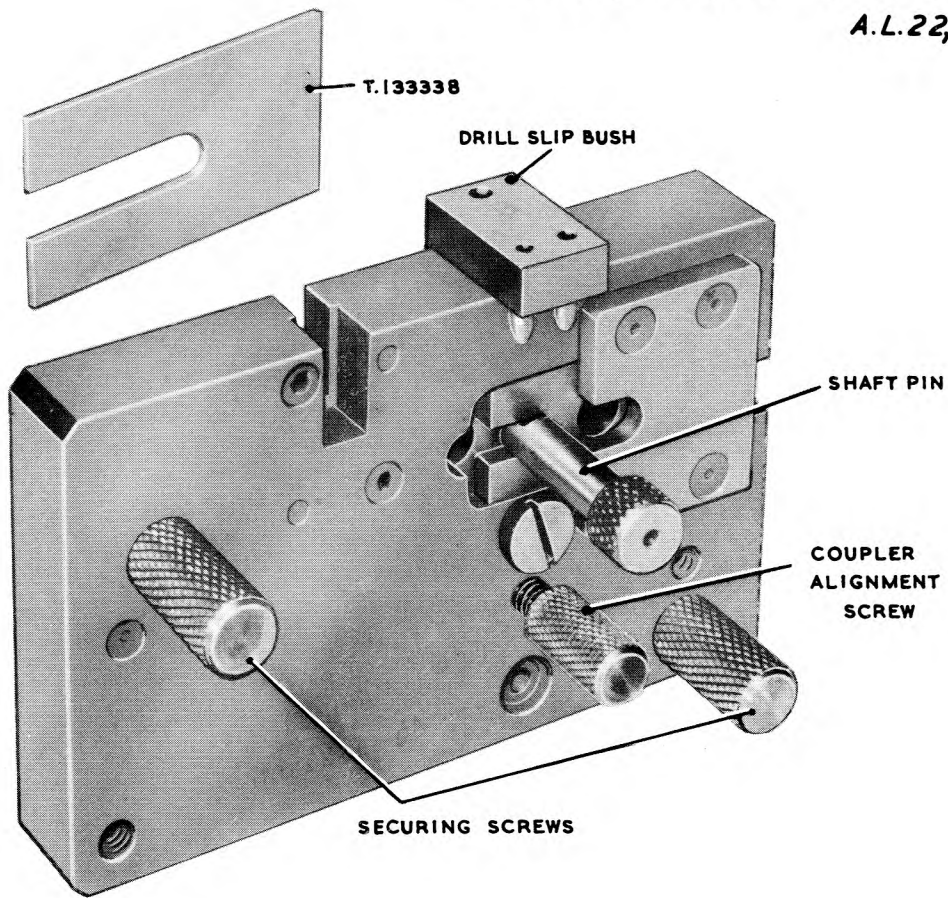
Drill and ream jig Ref. No. IOAG/968
